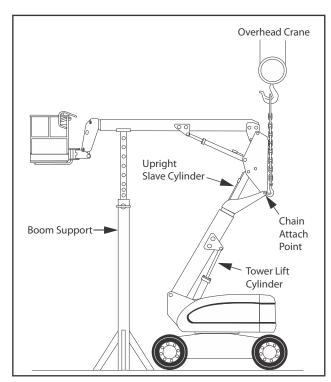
Boom Positioning and Support, Cylinder Repair
